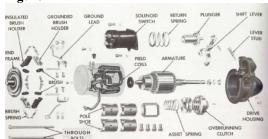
Exploded view of a typical starter, a Delco-Remy unit is shown
